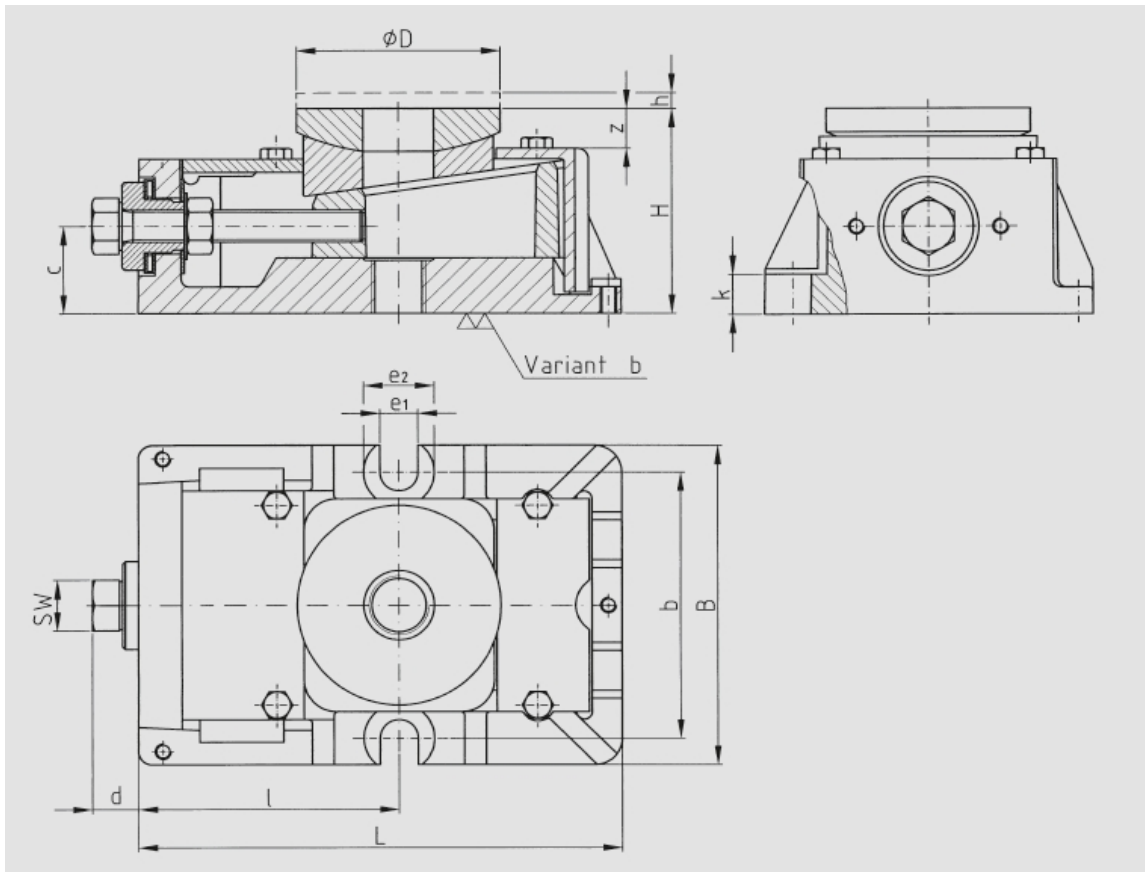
Section drawing of a Fixator - the dimensions are reported in Table 4.26.
